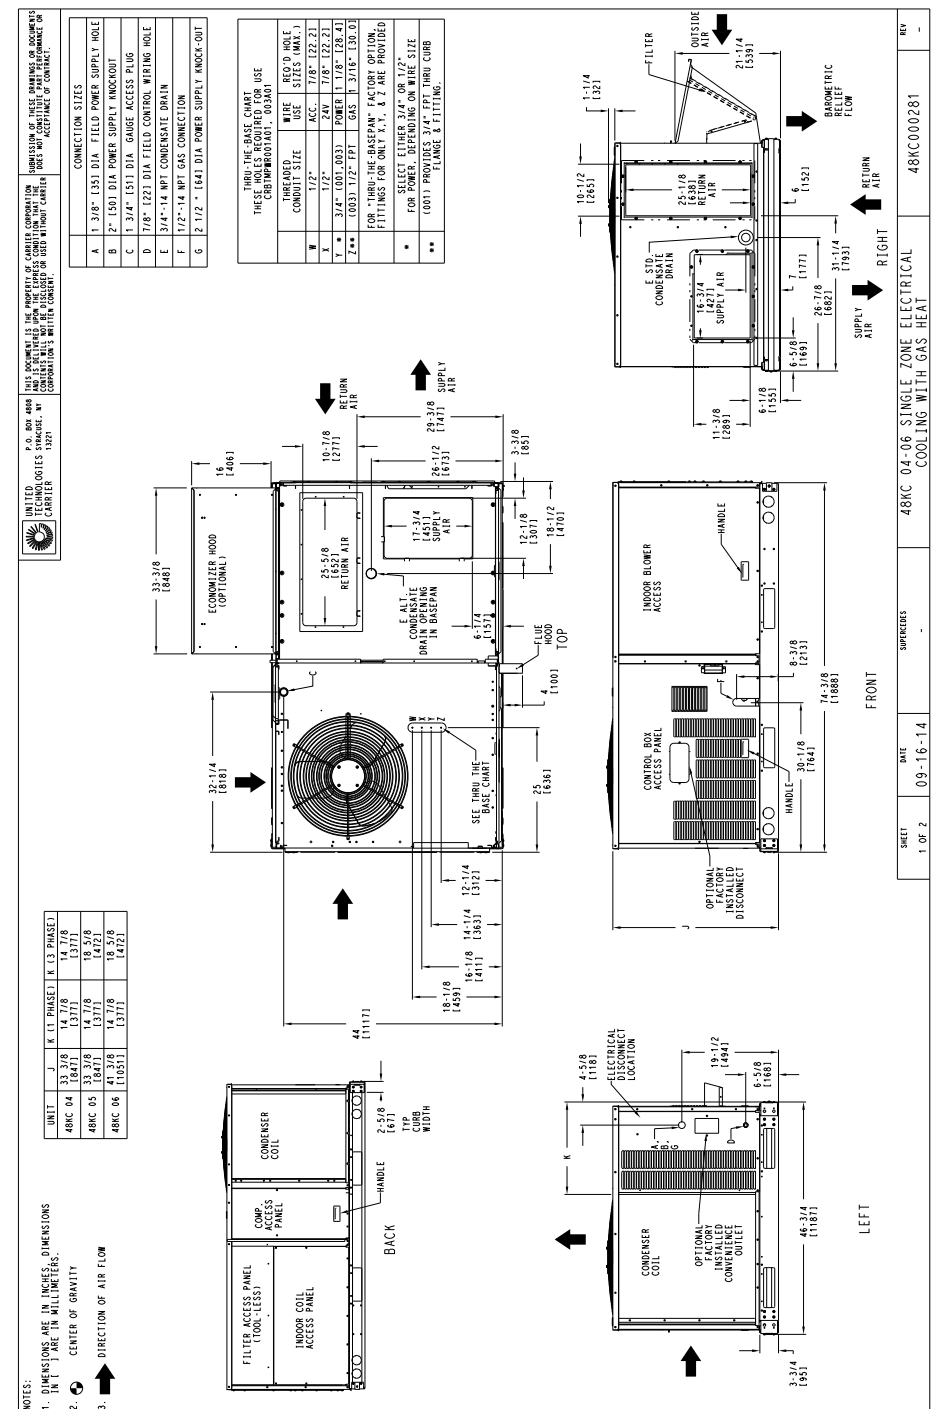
Dimensions 48KC 04-06 (sheet 1 of 2)
